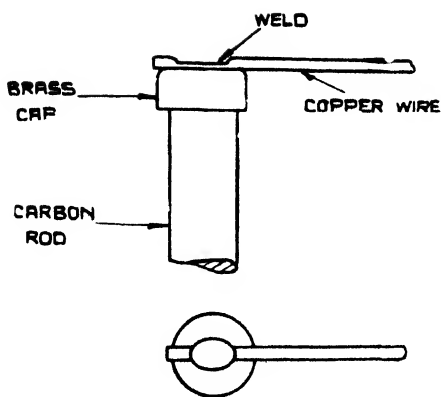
COPPER WIRE WELDED TO BRASS CAP IN HIGH-TENSION RADIO BATTERY
